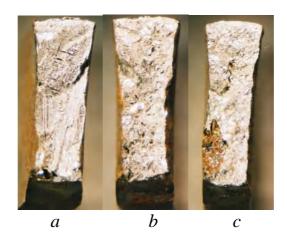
Fracture surface after the impact test: a - F15; b - F20; c - F25
